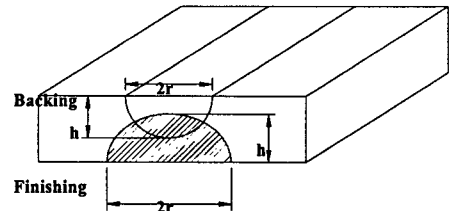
Shape of weld pool idealized for I butt SA weldment with 2 pole
